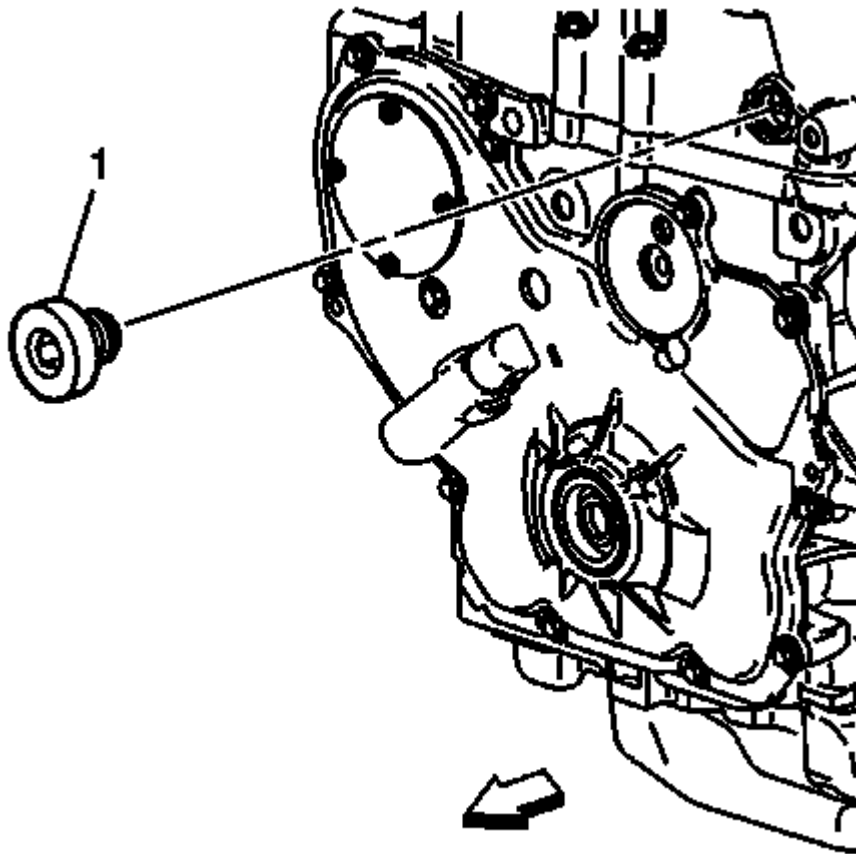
Identifying Exhaust Camshaft Actuator
